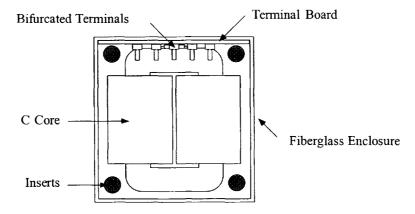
Terminal Boards, Bonded to the Wall of Rectangular Cup.
